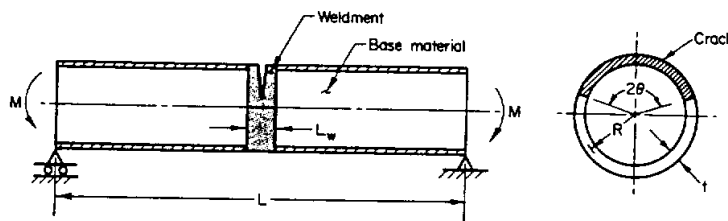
Schematics of pipe weldments with a circumferential flaw.
